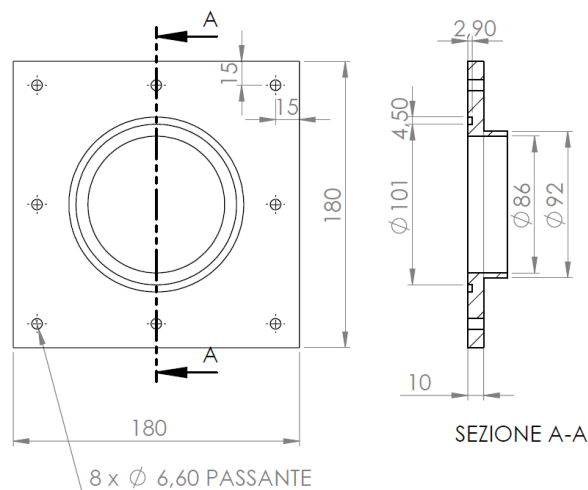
Technical drawing of the flange, a critical part of the tank.
